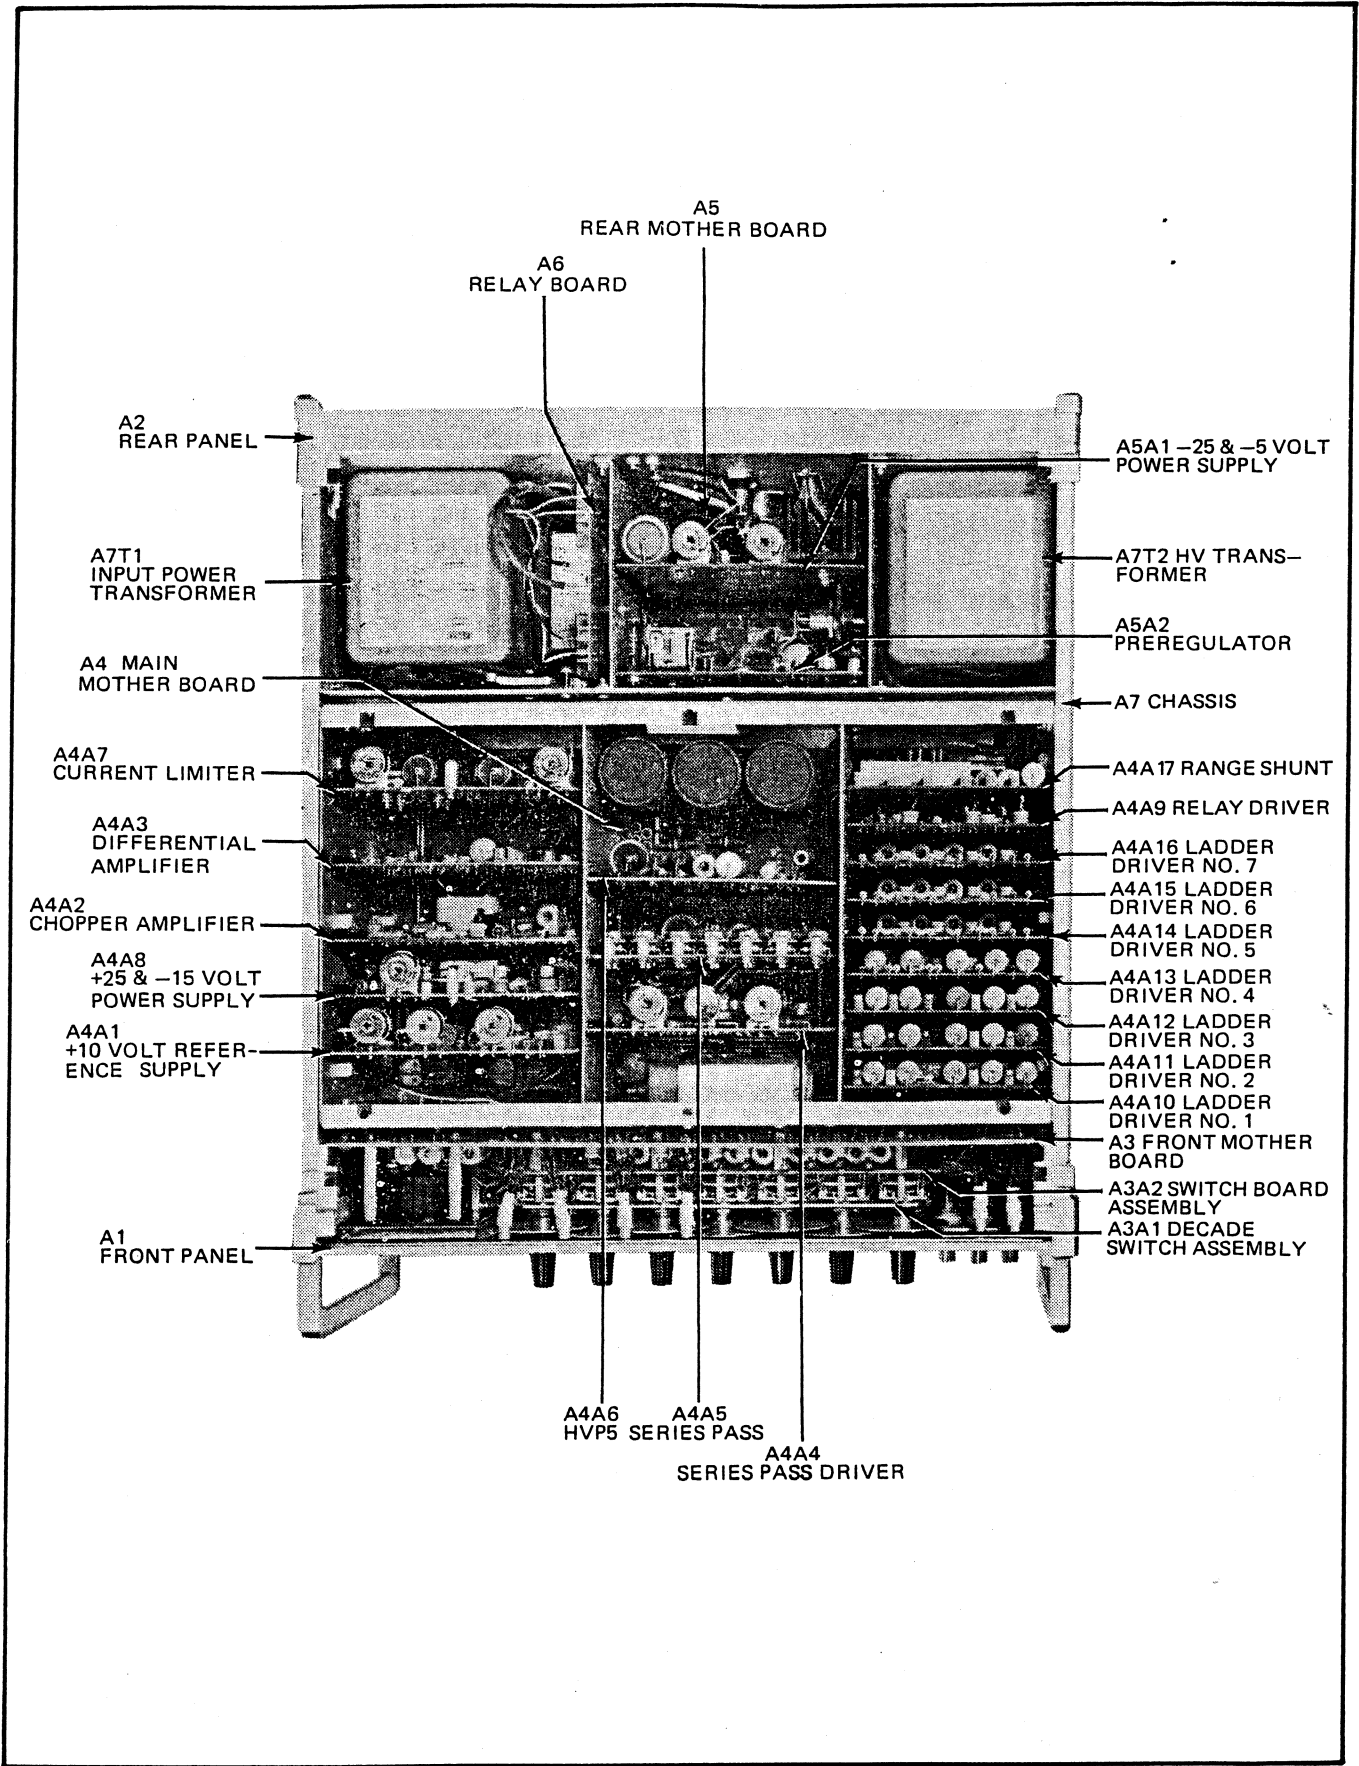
ADJUSTMENT, TEST POINT AND ASSEMBLY LOCATIONS (Sheet 2 of 2)
